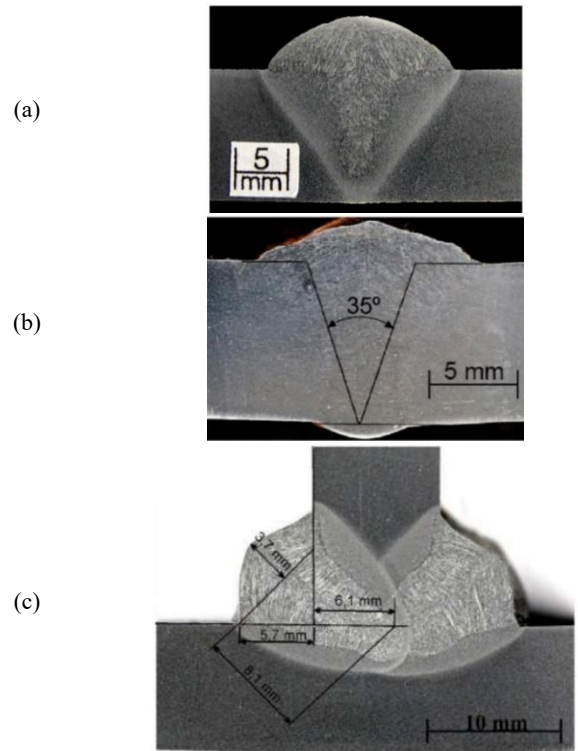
Examples of welds performed with DynaFlex-Arc: In (a) Plate deposition; (b) V-groove butt weld; (c) T' fillet joint.
